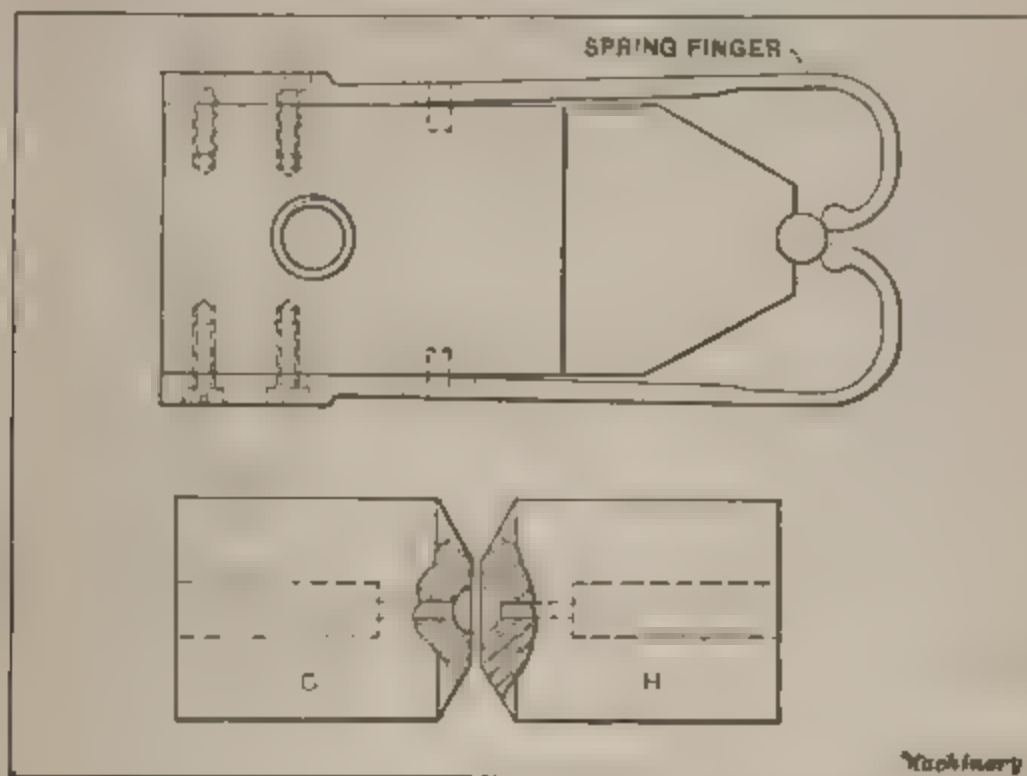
Details of Cut-off Slide and Dies of Machine in Fig. 11
